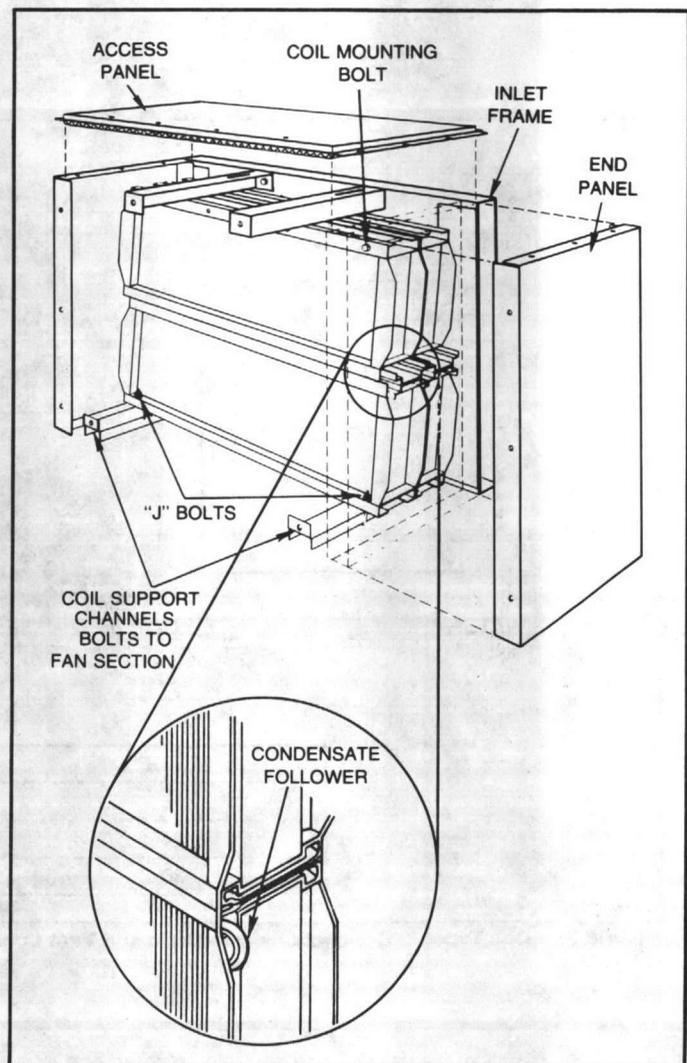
B - Draw-Thru Unit Coil Section Details with View of Condensate Follower
